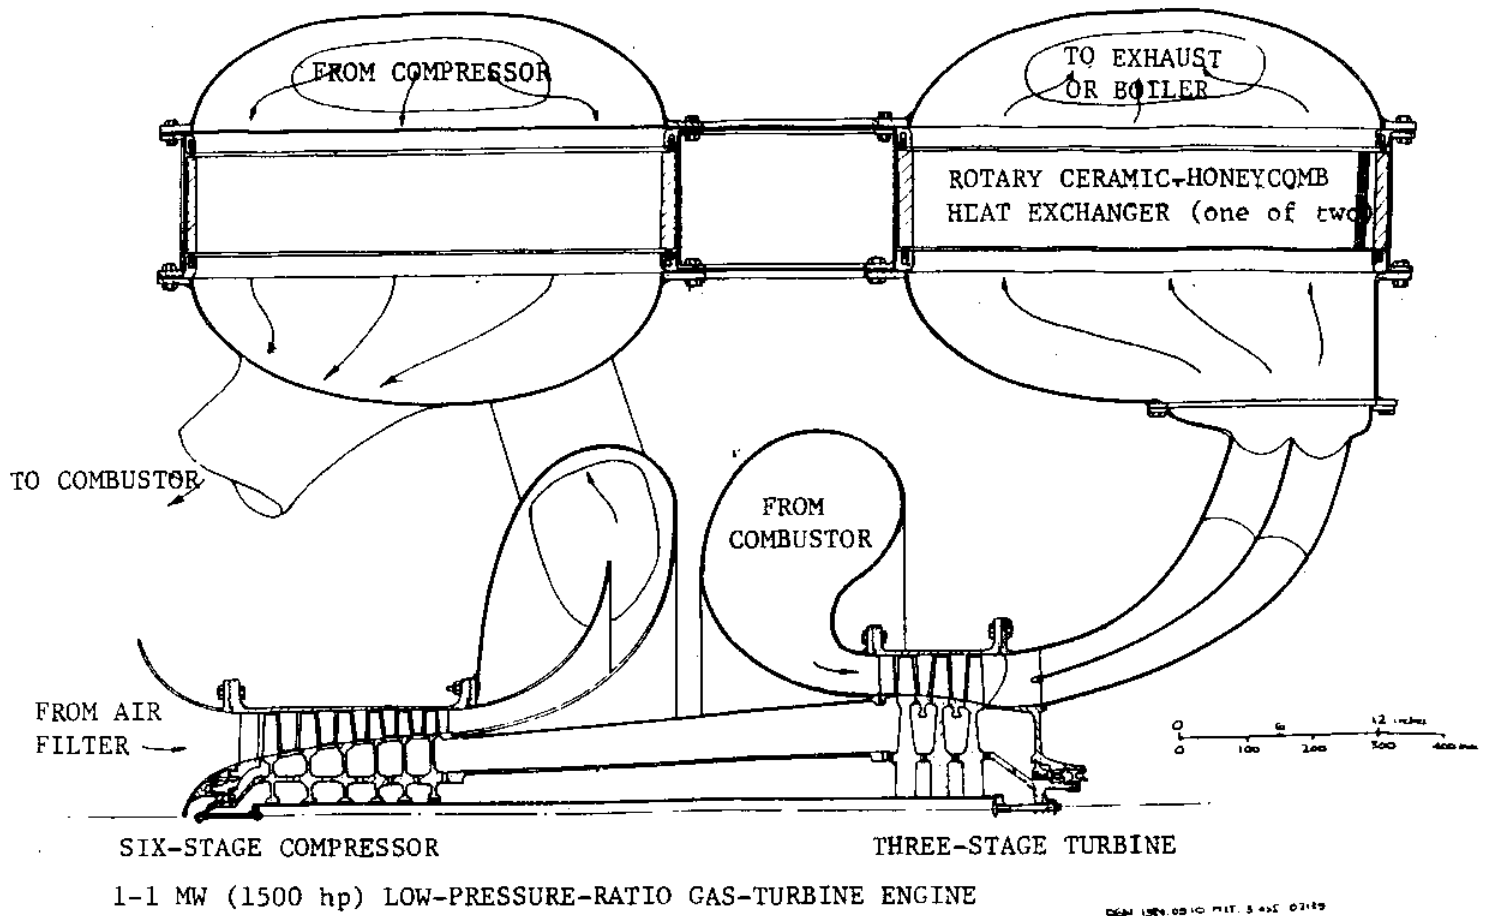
CROSS-SECTIONAL SKETCH OF THE LPR GAS-TURBINE ENGINE.
